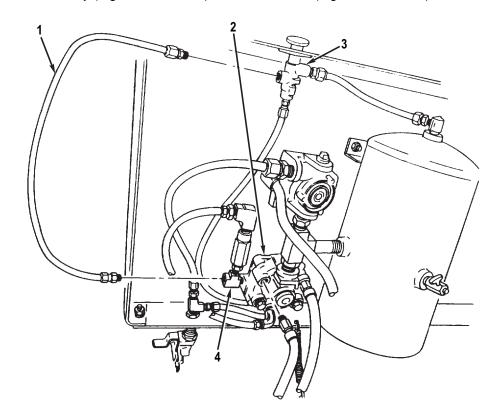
Airbrake Valve-to-Relay Emergency Valve Tube Assembly Replacement.
